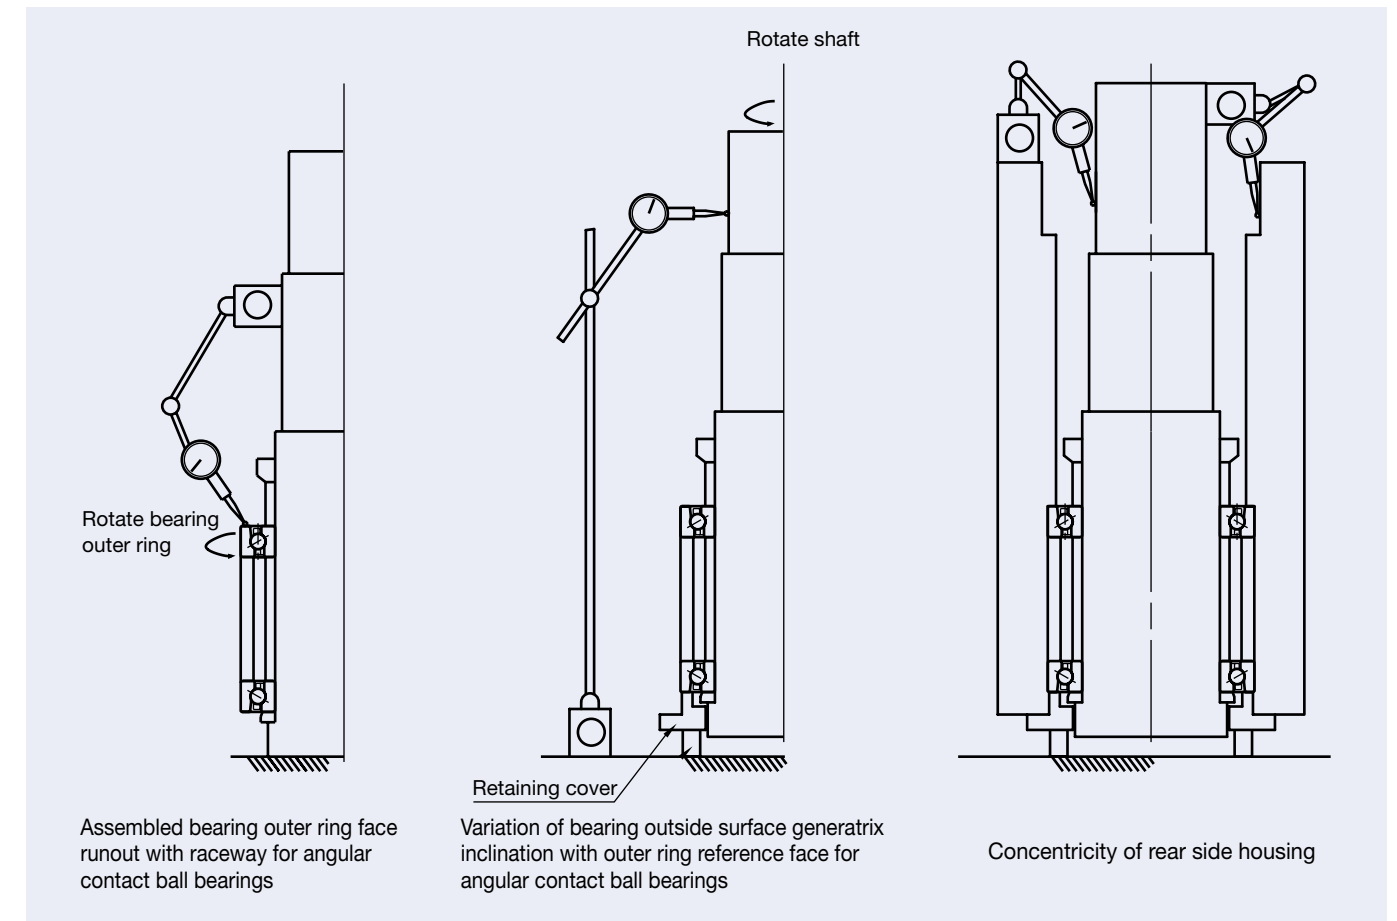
Runout Accuracy of Machine Tool Spindle
